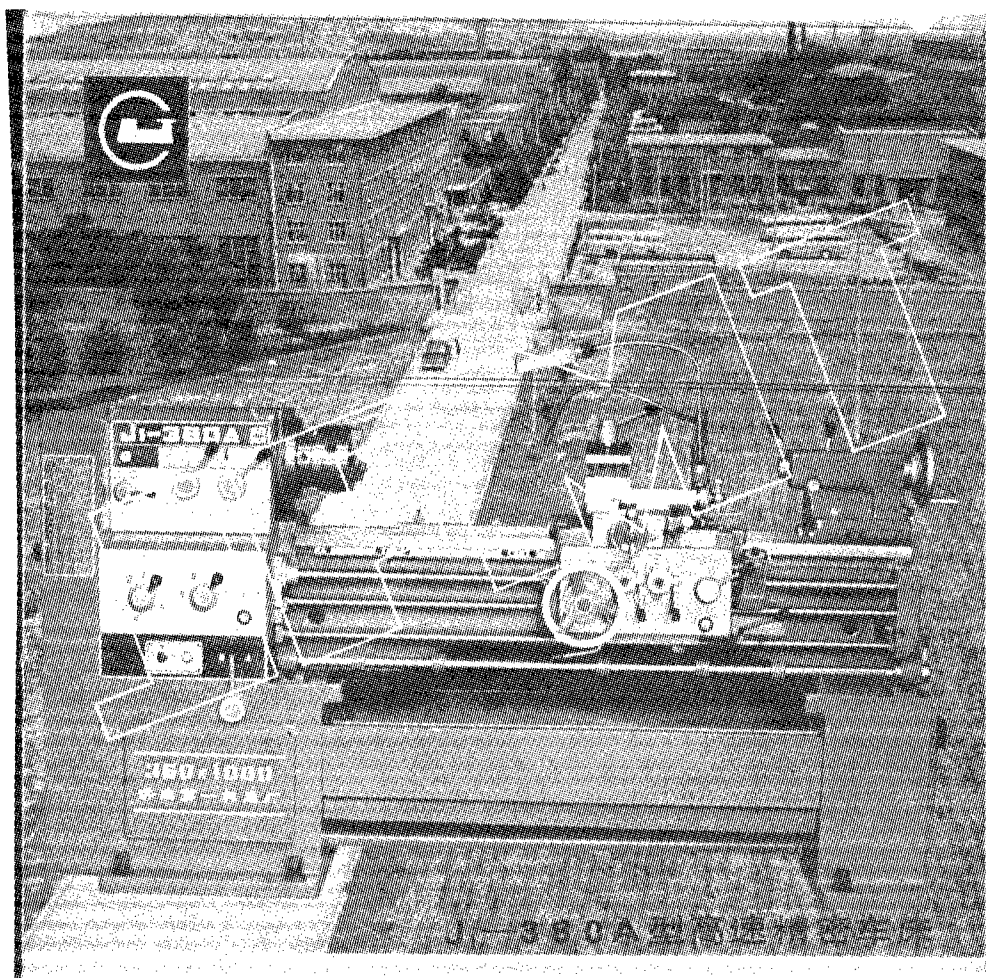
Sectional view of the Jinan Machine Tool Plant No 1, a major manufacturer of high speed precision lathe in China.
